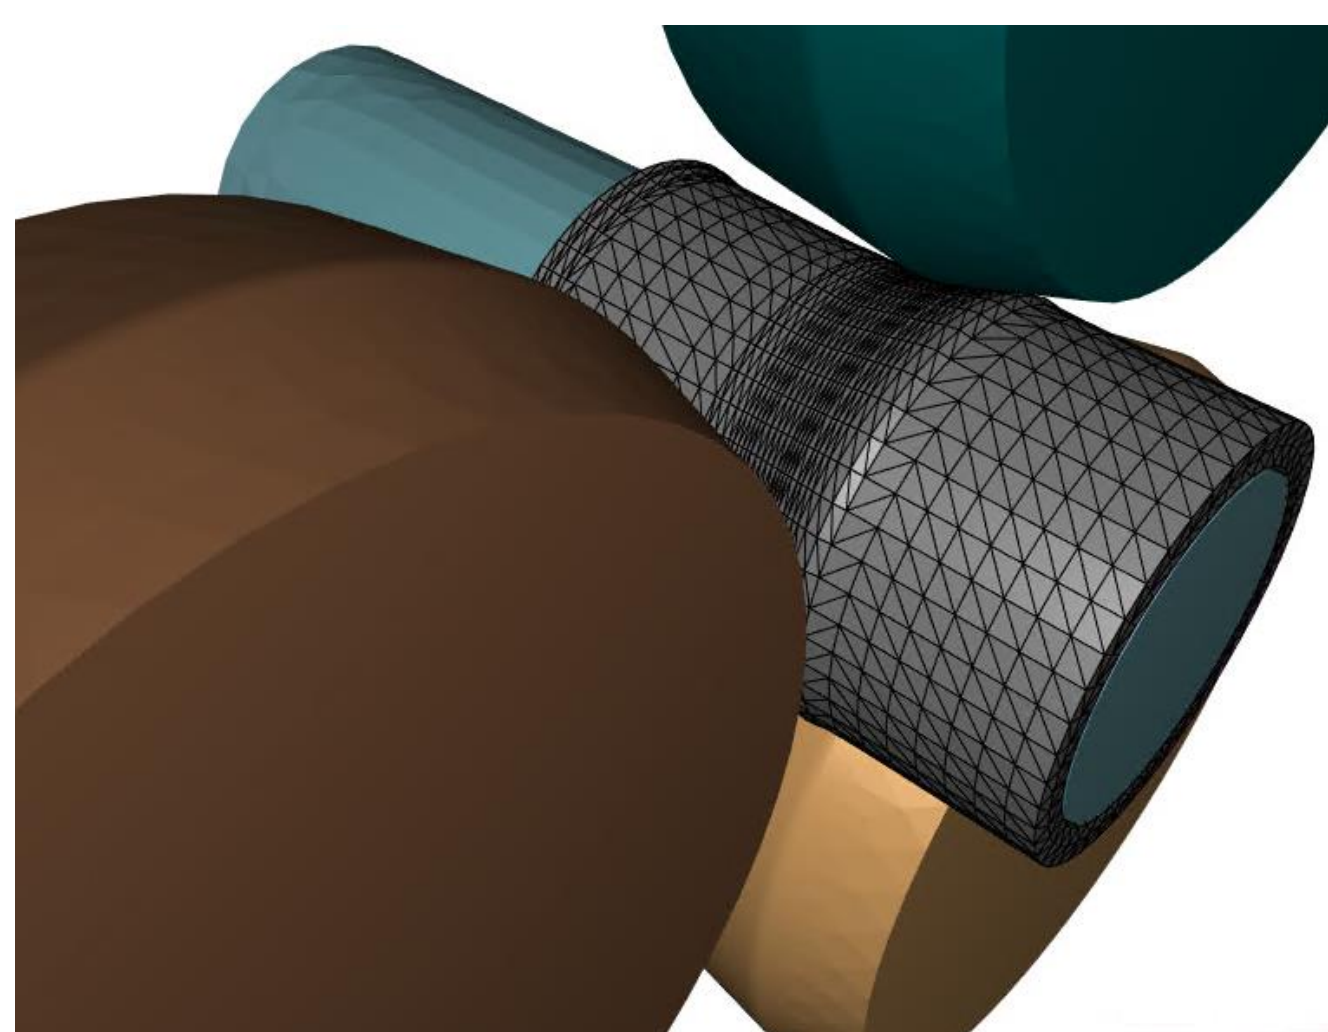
Mesh demonstration of the workpiece, roller, and mandrel
